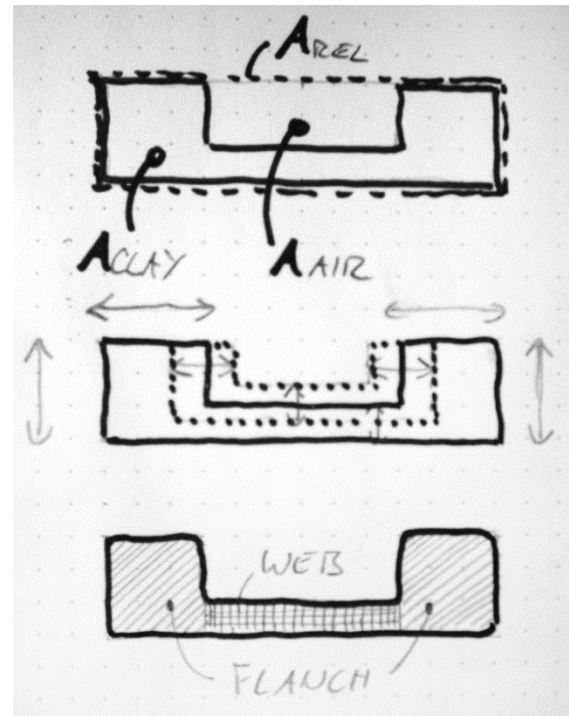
, Sketch of a U-shaped Nozzle possible modifications. Web thickness: b , Flanch
